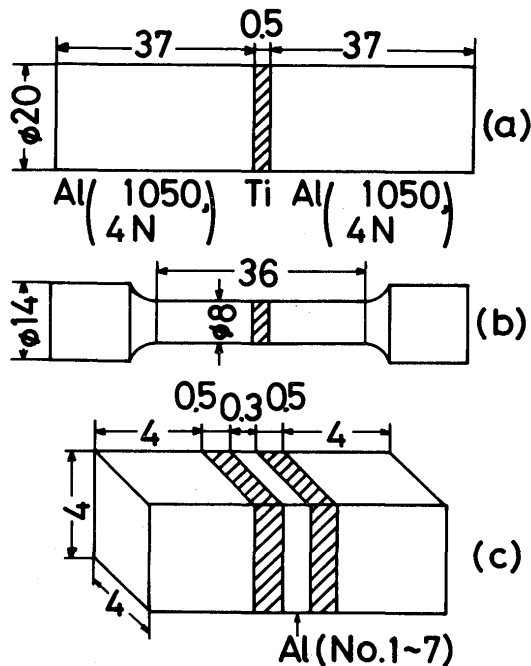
(a) Dimensions and arrangement of specimens for the diffusion welding of titanium to 1050 or 4N aluminum. (b) Dimensions of a specimen for tensile test prepared from a joint as shown in (a). (c) Dimensions and arrangement of specimens for the diffusion welding of titanium to aluminum No. 1 ~ 7 in Table 1.
